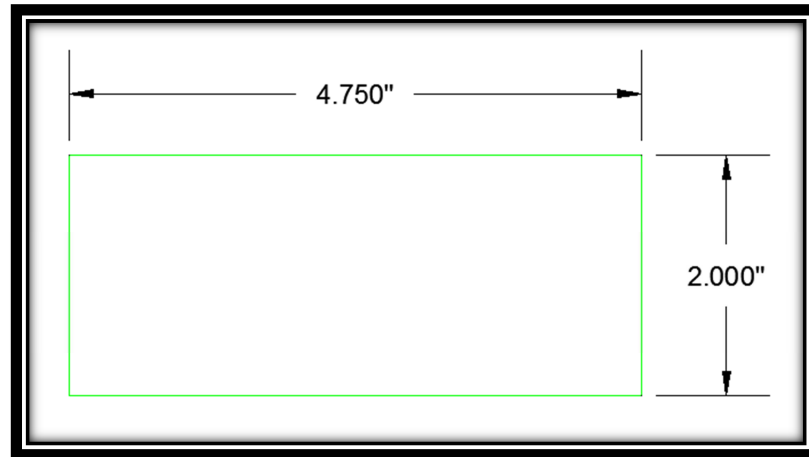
Axle Holding System – Vertical Support Piece Dimensions
